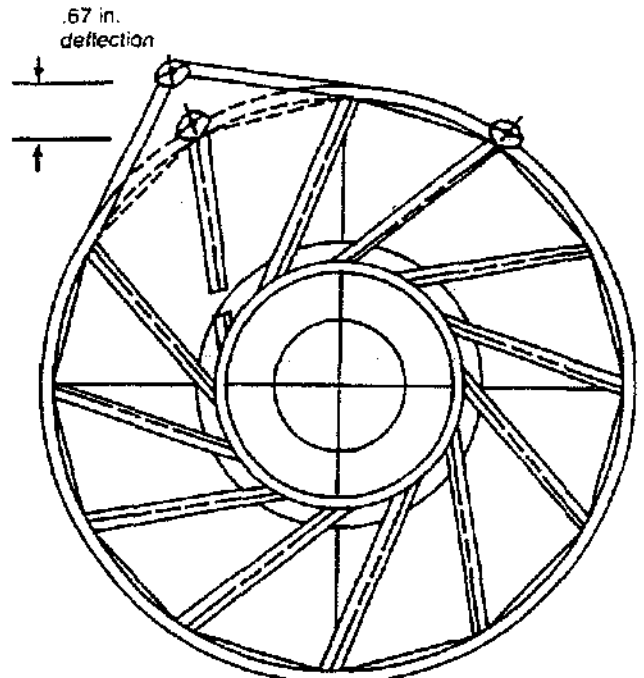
Induced Partial Crack in Weld Joint
